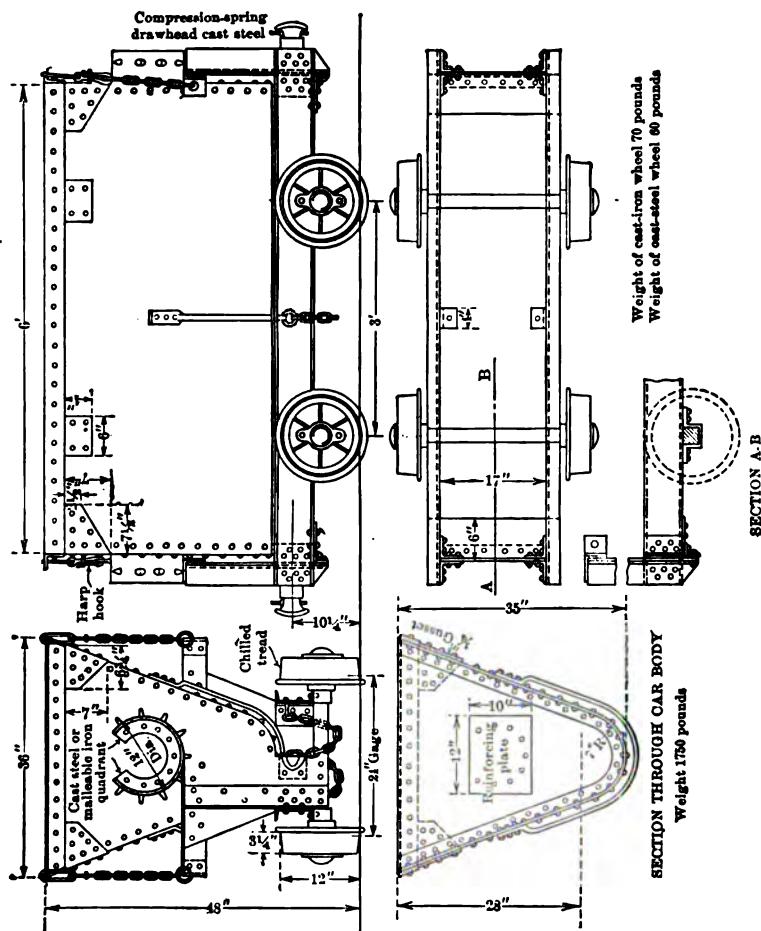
Rocker dump tunnel car used on Los Angeles Aqueduct.
